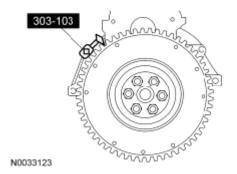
Installing Flywheel Holding Tool Courtesy of FORD MOTOR CO.
